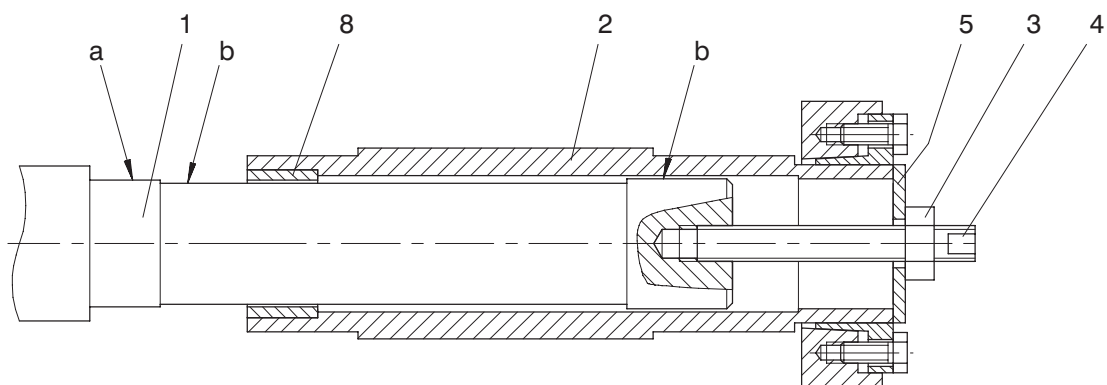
Mounting hollow shaft and shrink disk
